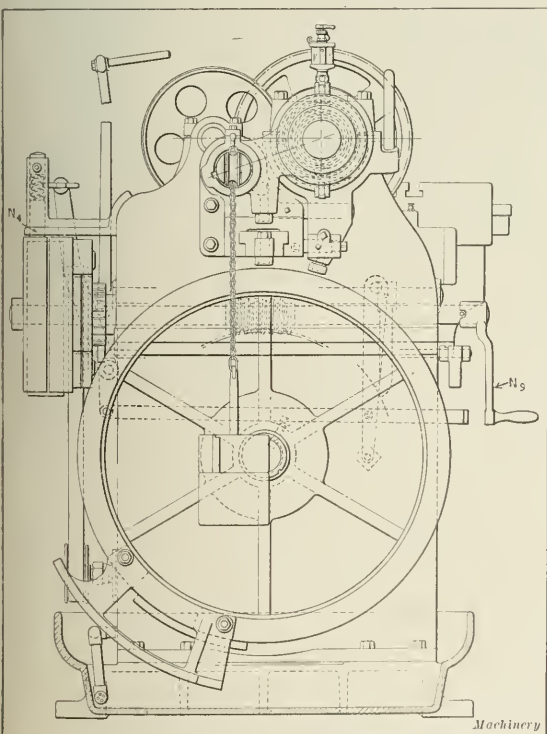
Rear End View, showing Power Feed Mechanism and Main Cam Drum
